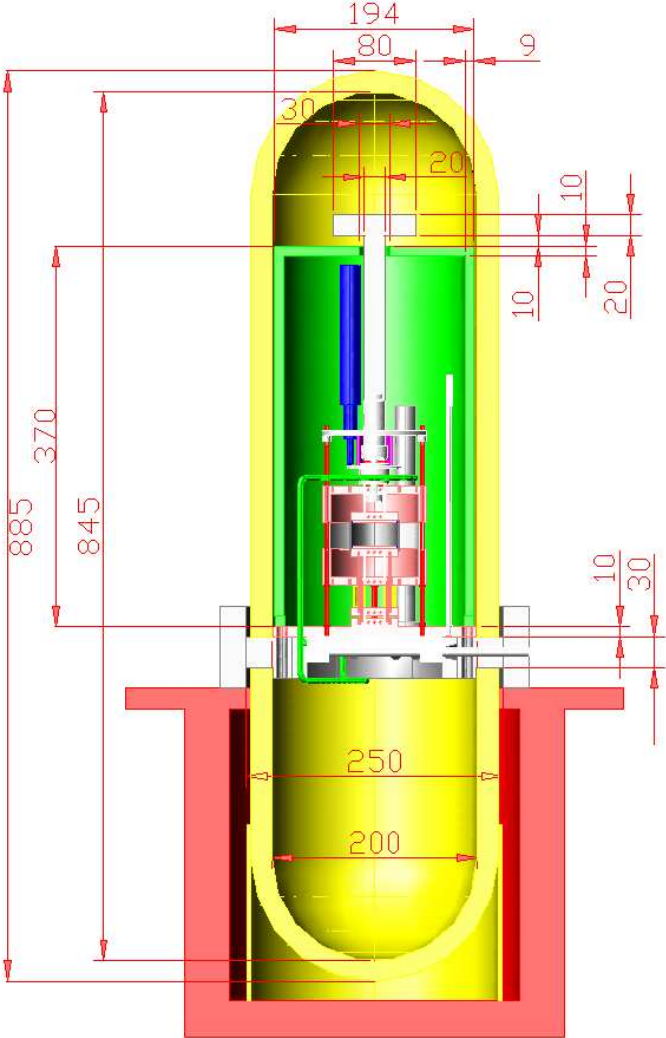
Cross-section of the thermal multimeter with dimensions
